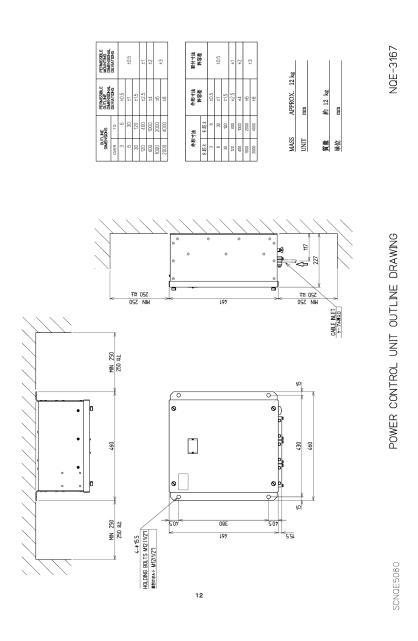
Outline Drawing of Power Control Unit, Type NQE-3167 (Option)
